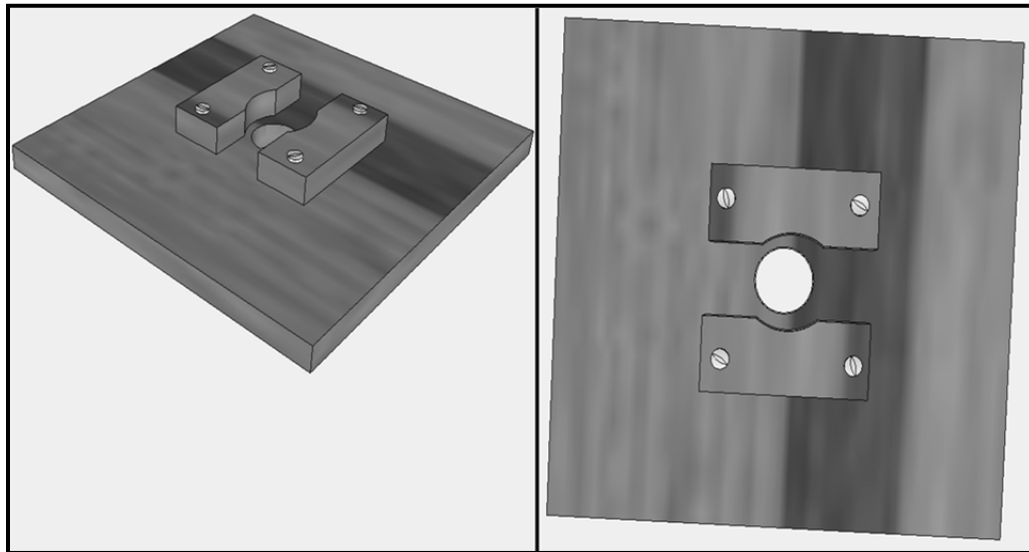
Two blocks of wood for motor (Left). Top View of Model (Right)
